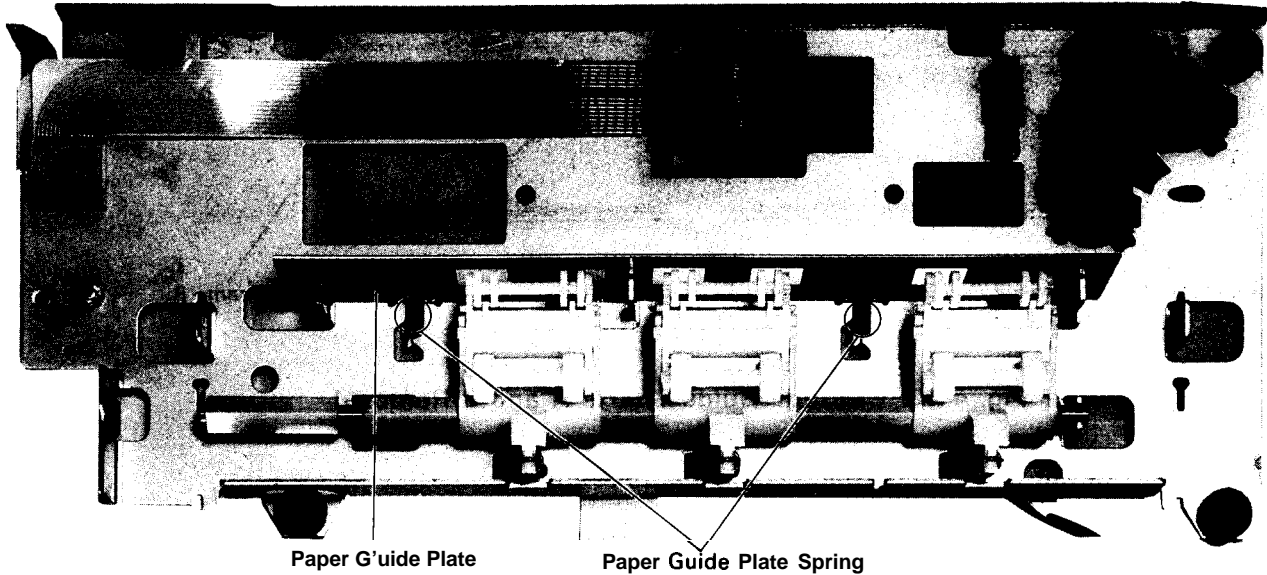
Positional Relationship Between Paper Guide Plate and Paper Guide Plate Springs
